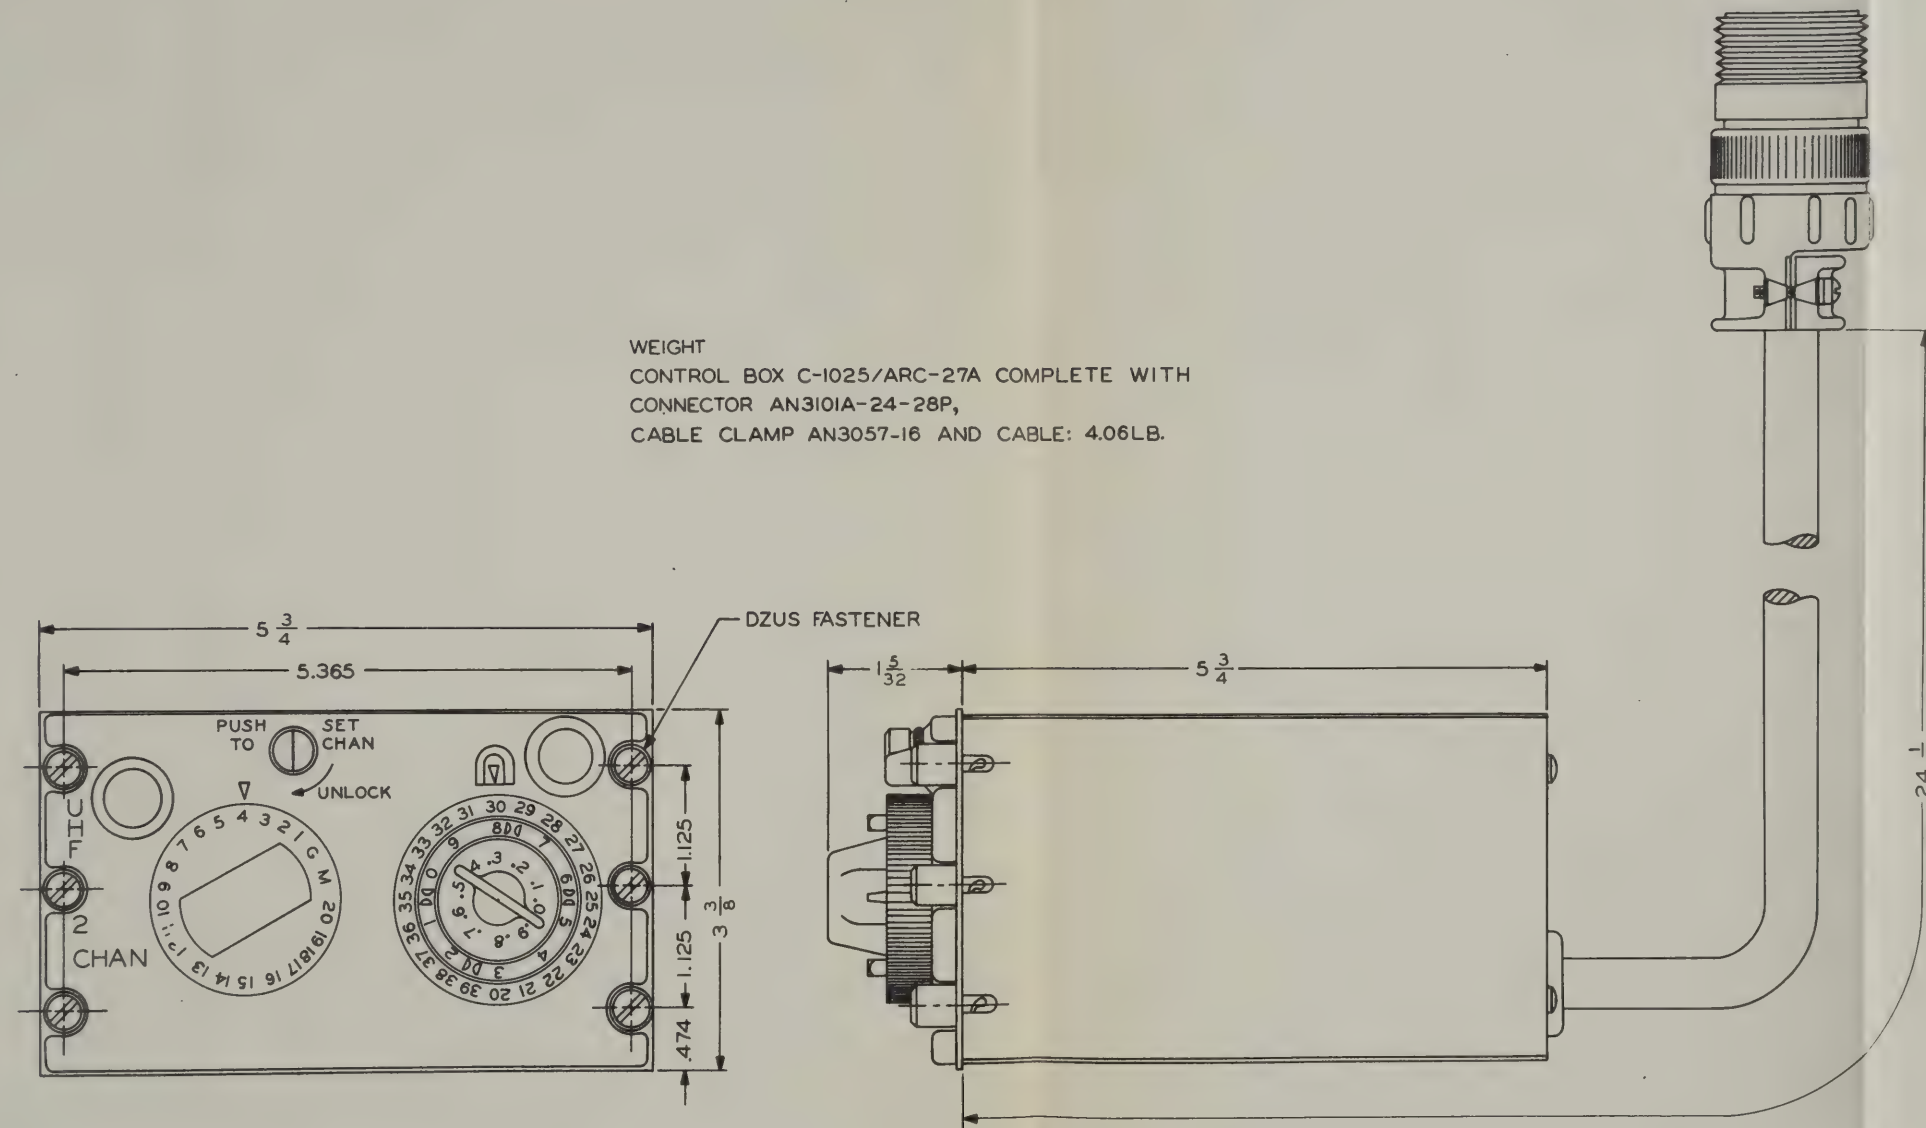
L. Radio Set Control C-1025/ARC-27A, Outline and Mounting Dimensions
